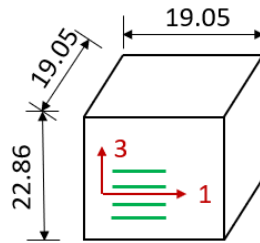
Typical specimen geometry and layout 1-3 plane speckled (all dimensions in mm).
